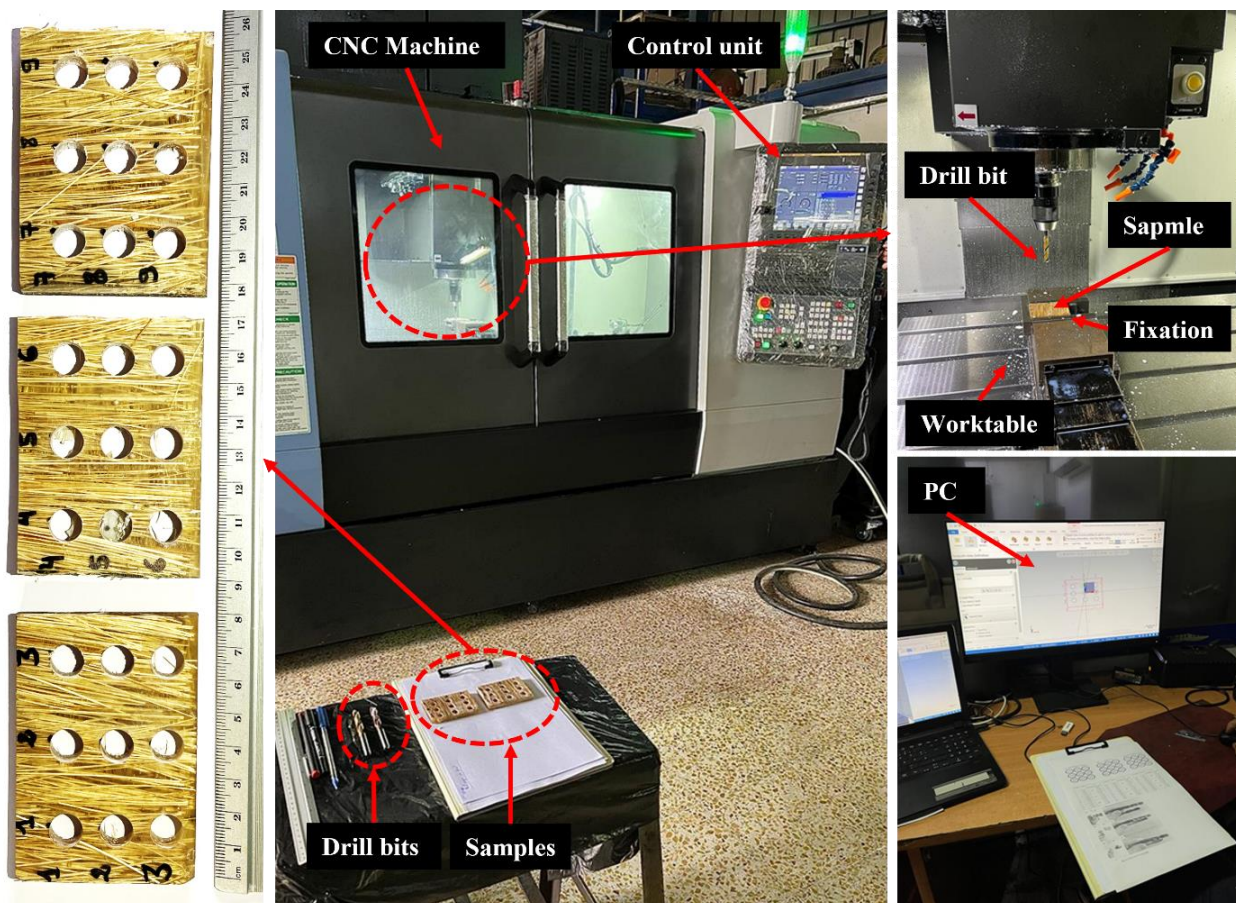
Configuration for drilling of DPFP40 using the DOOSAN DNM 6700 CNC machine.
